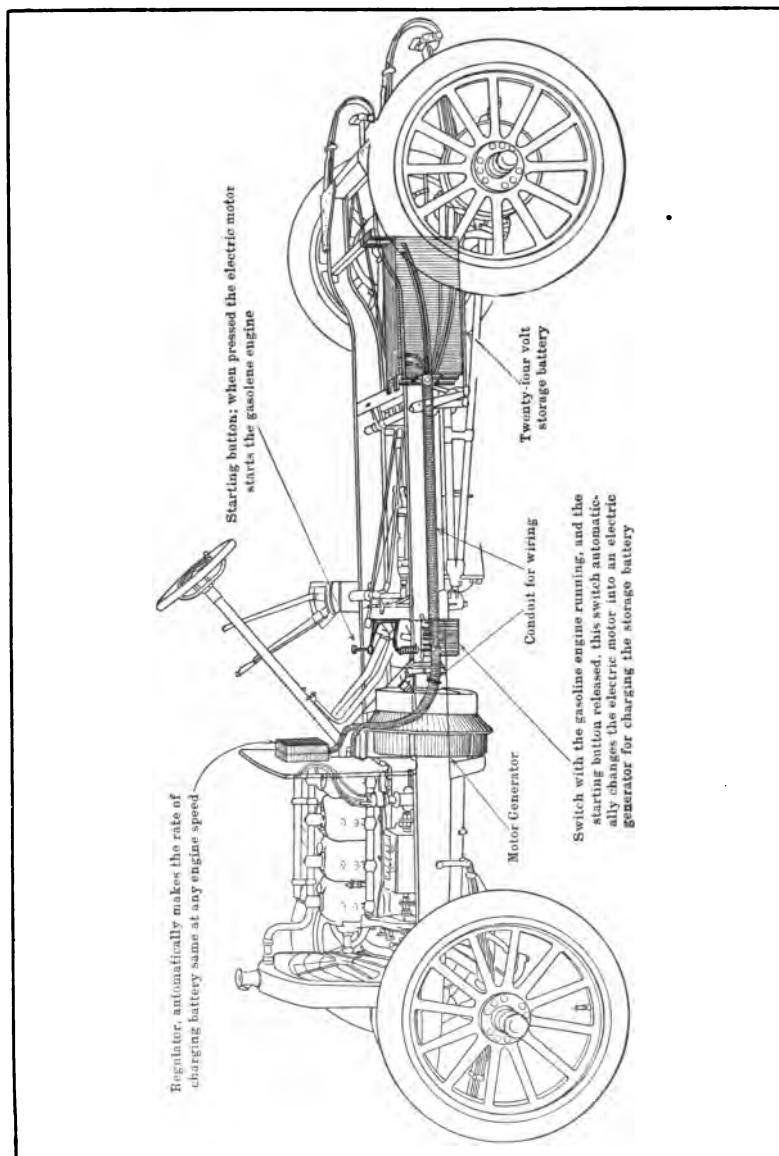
View of Complete Automobile Chassis Showing the Application of U. S. L. One Unit Starting and Lighting System, in Which the Motor-Generator Forms Part of the Power Plant Flywheel.
